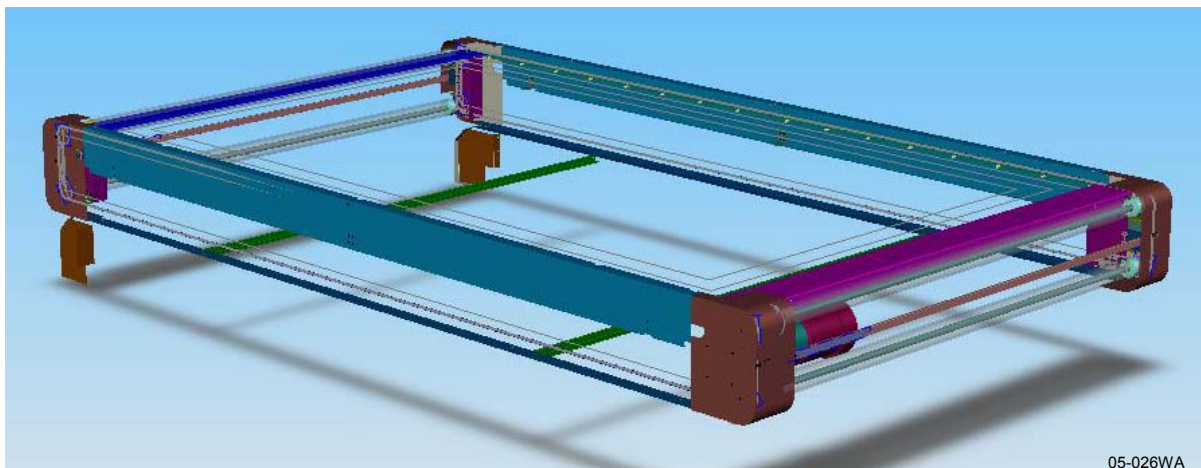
Module conveyor drive design for laminator automation (conveyor belt and laminator not shown for clarity).
